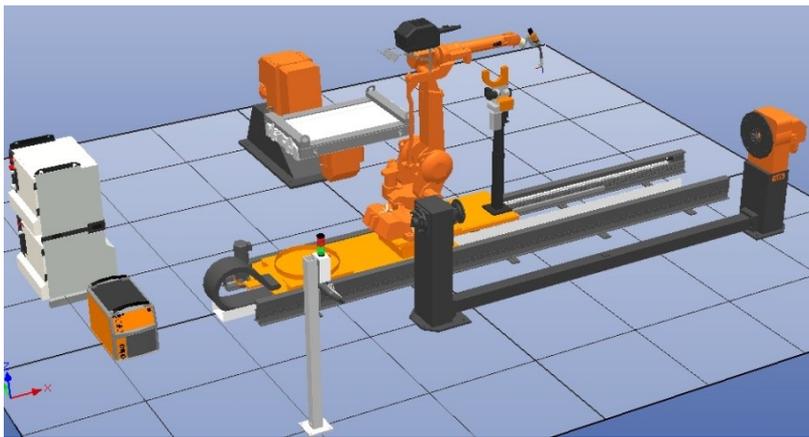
Robot welding cell 3D configuration in Norcar BSB Eesti Ltd
